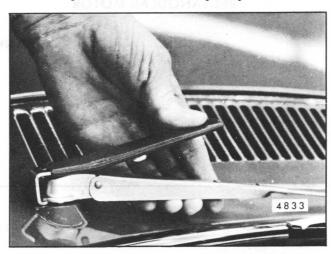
Wiper Arm Removal Tool J-8966 (Or Equivalent)
